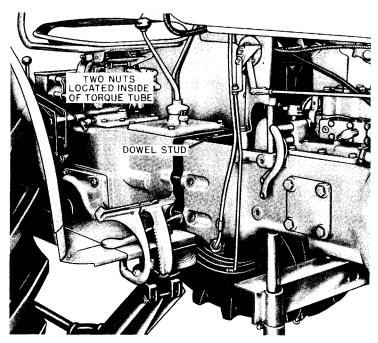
Assembling Transmission to Torque Tube - Right Hand View
